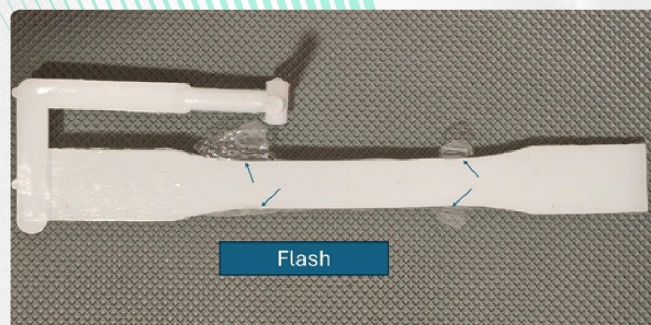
Injection moulded part produced at injection end positions of 25 mm.
